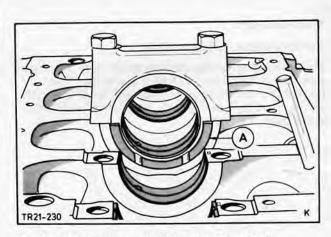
Cylinder block with half thrust washer fitted A – Half thrust washer
